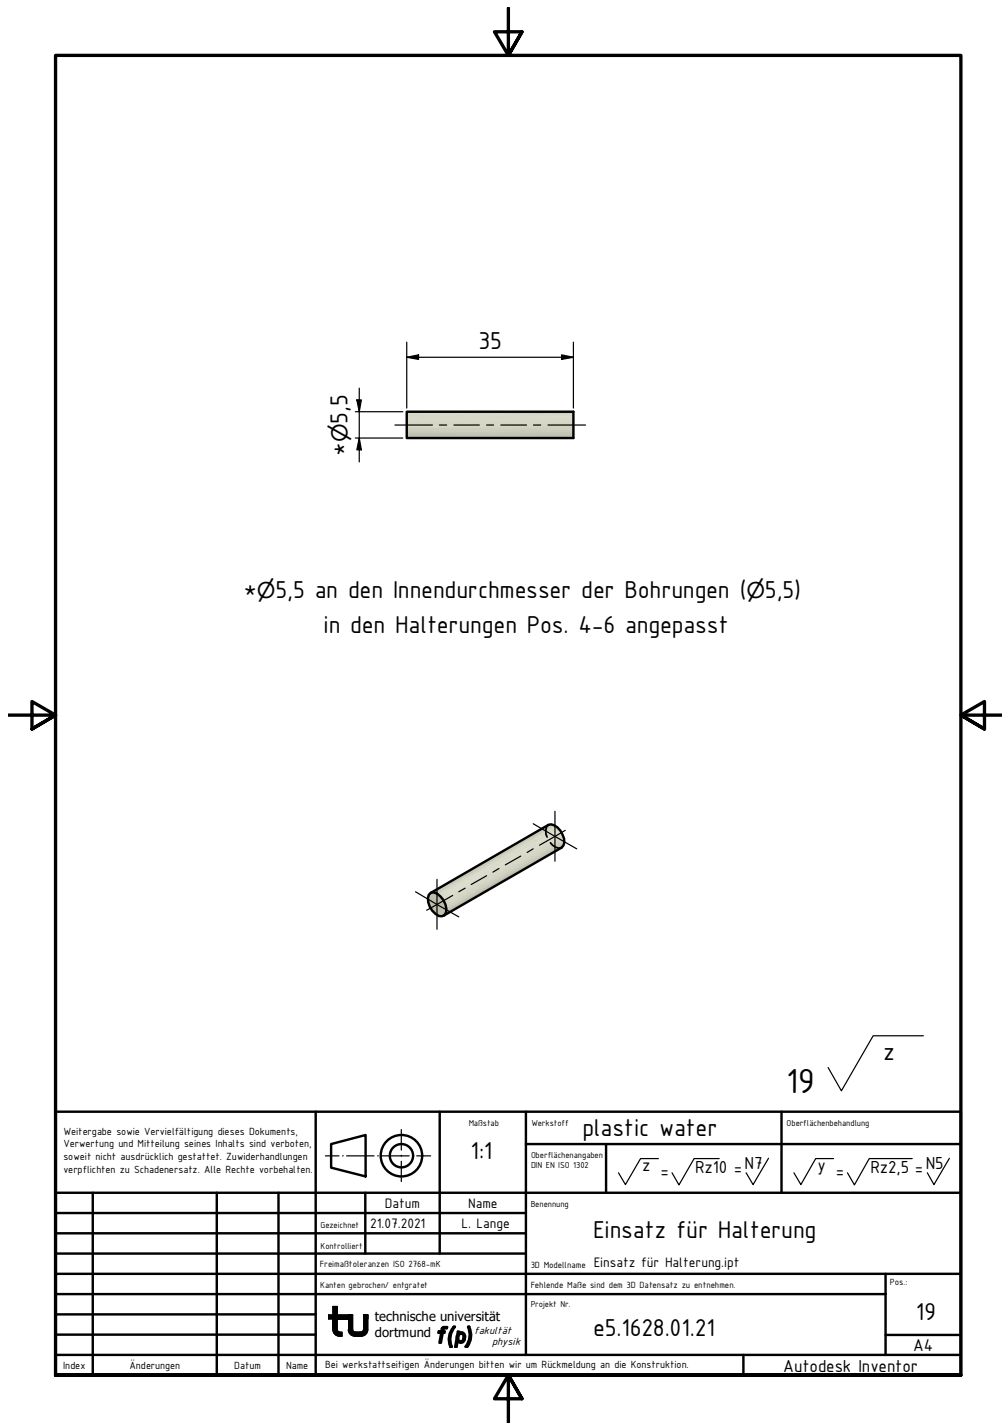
Construction Drawing: filling pieces for the scintillation detector bracket.
